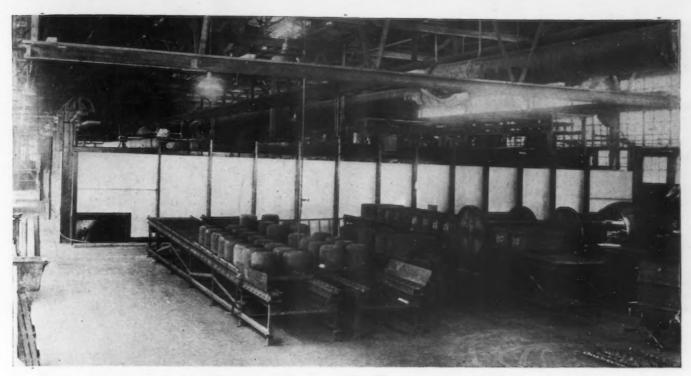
Loading and Unloading Equipment for Pot Carburizing. Straight-line counterflow furnaces in the rear
